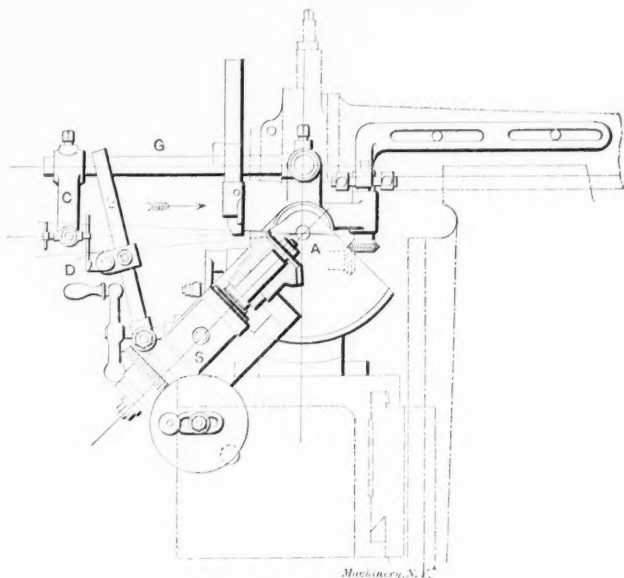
A German Shaper Attachment for Forming the Teeth of Bevel Gears on the Templet Principle.
